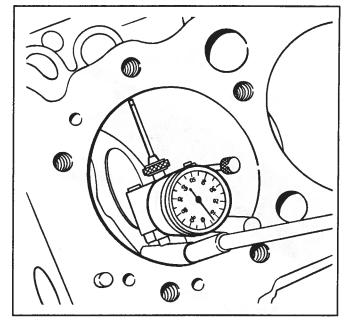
Using Dial Indicator To Check Cylinder For Taper And Out-of-Round
